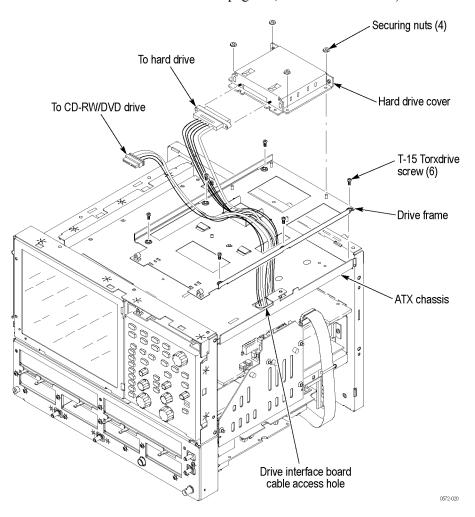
Hard drive and CD-RW/DVD drive mounting frame removal
